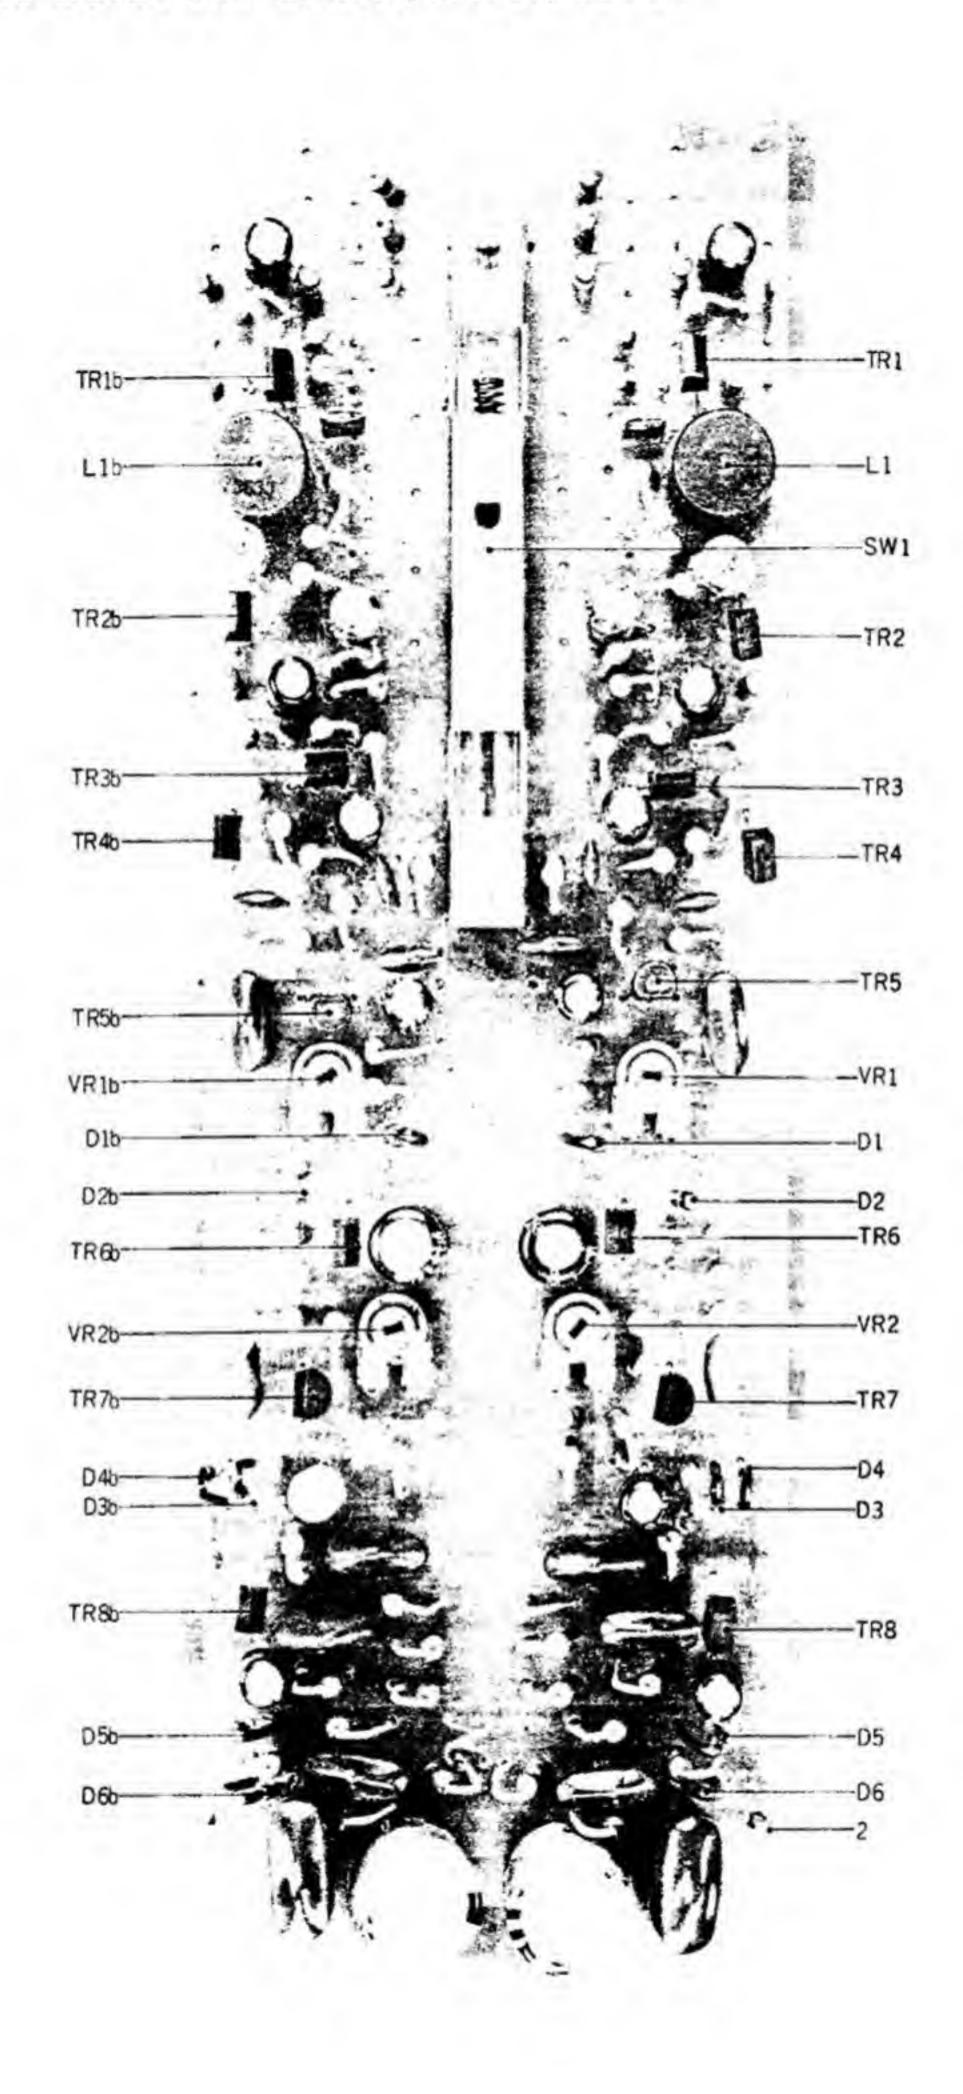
PHOTO OF OSC. POWER SUPPLY P.C. BOARD (LE-5021) BLOCK
